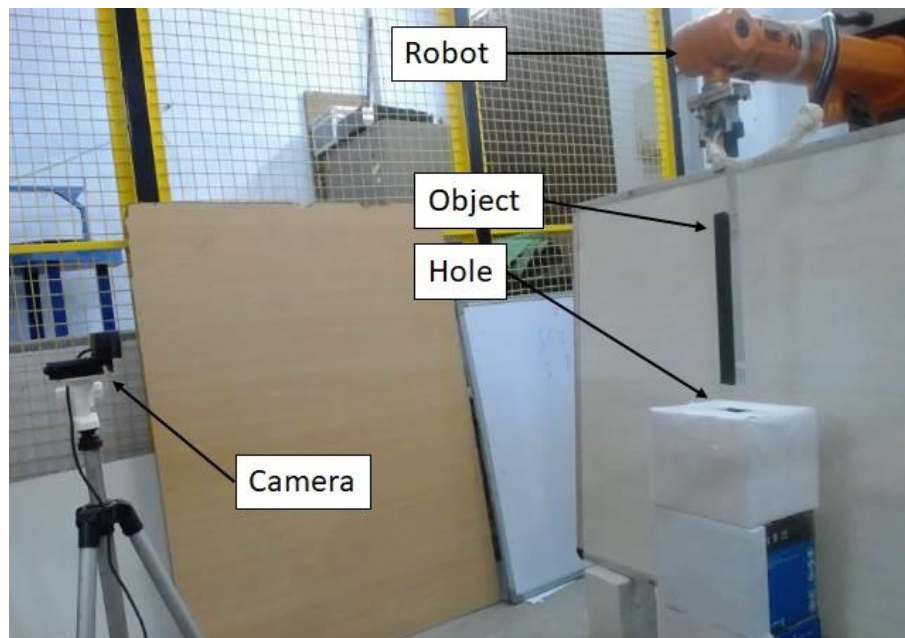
Aluminium object with flexible metal strip assembly setup.
